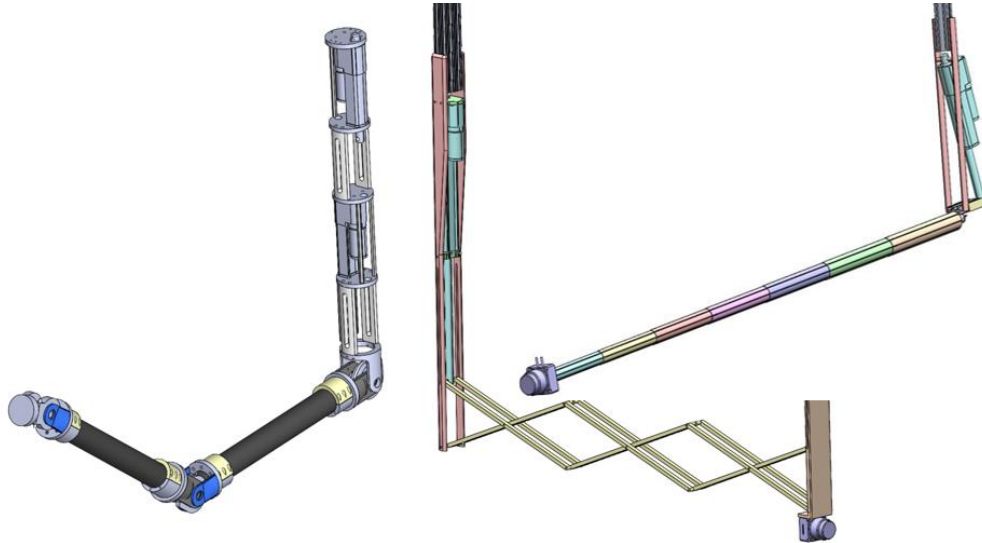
FIU robotic arm concept designs. Cable driven, scissor, telescoping (from left to right).
